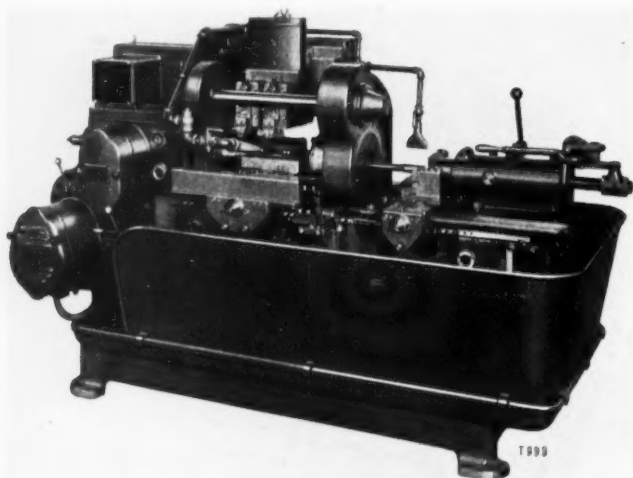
Sundstrand Model 10 Automatic Stub Lathe, with center drive and overhead slide, for turning axle shafts.
